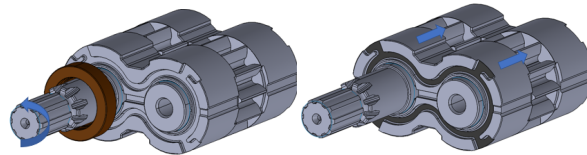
Major Seals inside the reference EGM a) Shaft Seal b) Bearing Block Seal
